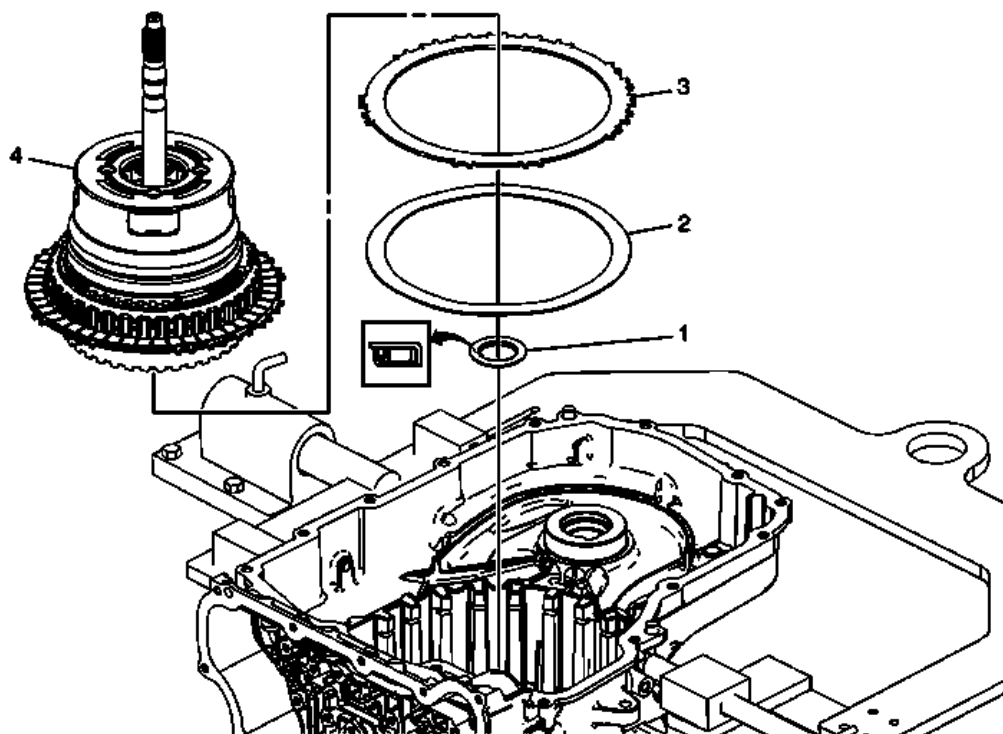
View Of 3-5-Reverse, 4-5-6 Clutch Housing, Input, Reaction & Output Carrier Components
